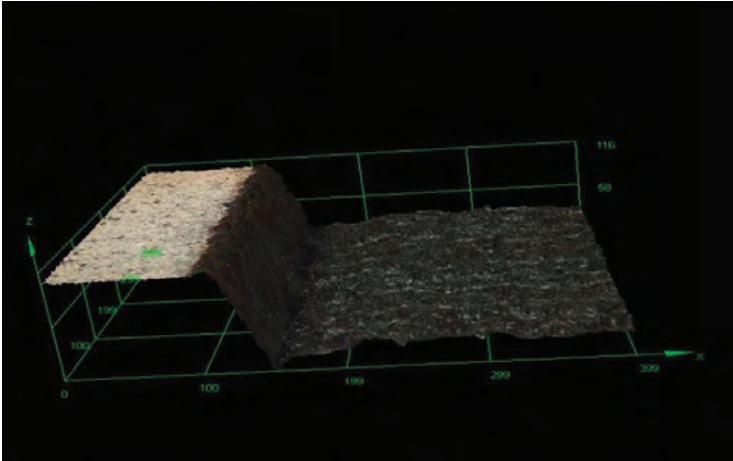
Well shape and surface integrity inspected after laser engraving. High-resolution 3D imaging enables inspection of well morphology and surface integrity, optimizing laser engraving parameters and avoiding surface damage. (Olympus DSX500 digital light microscope).
